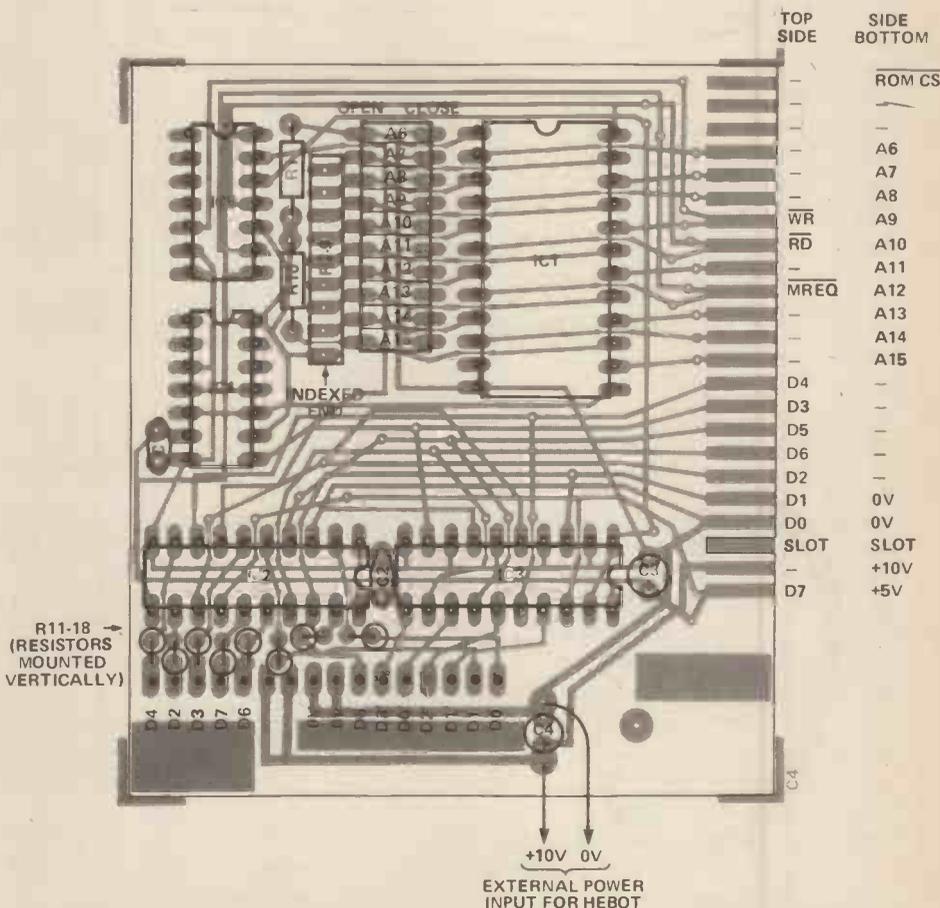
The component layout of the Interface Board. Note that both sides of the double-sided PCB are shown.
